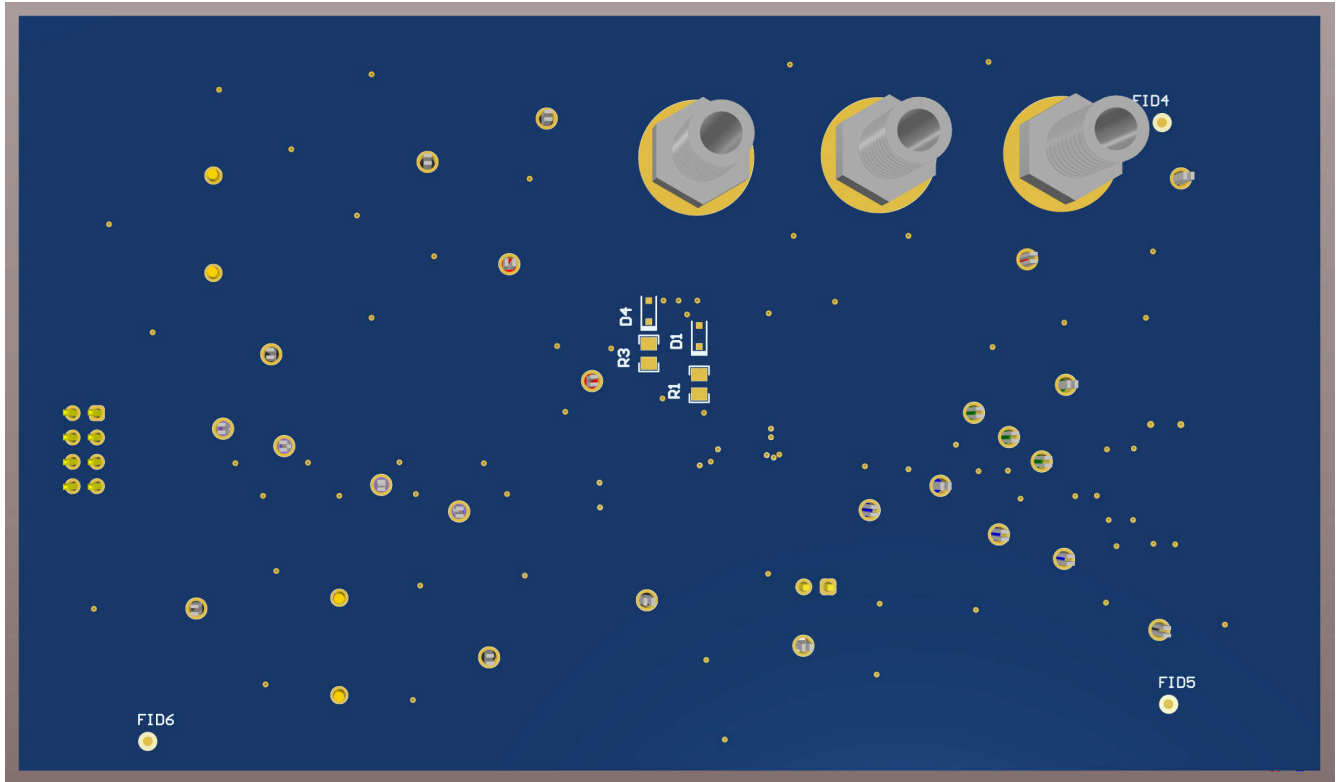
TLIN1124AEVM Layout Bottom Side
